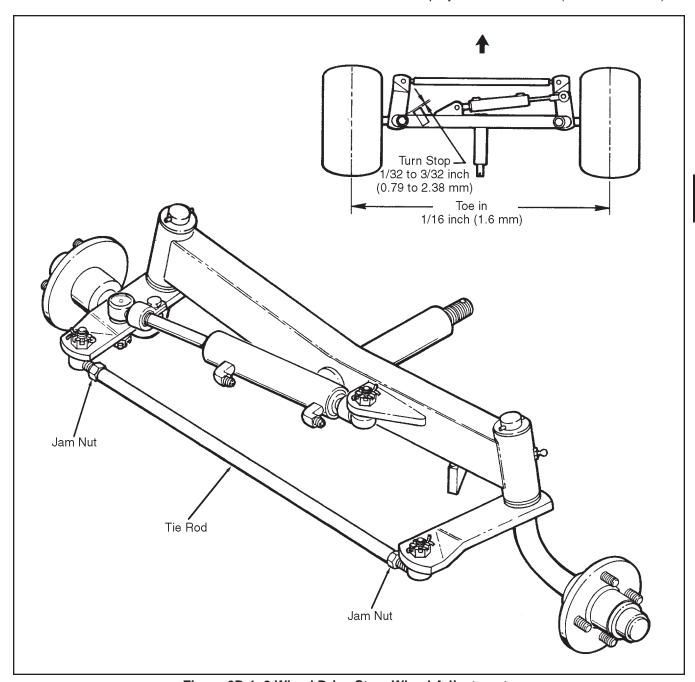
D-1. 2 Wheel Drive Steer Wheel Adjustments
